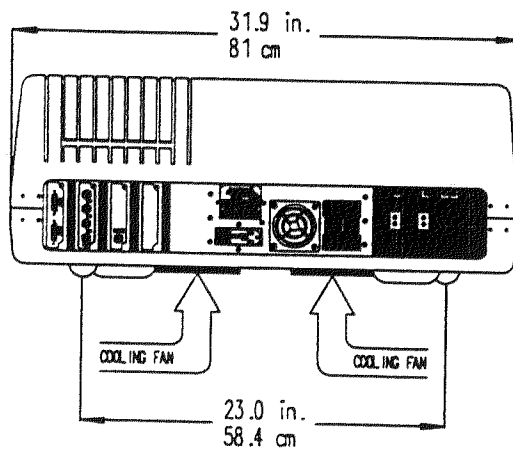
AMPRO 4300 SYSTEM DIMENSIONS.
